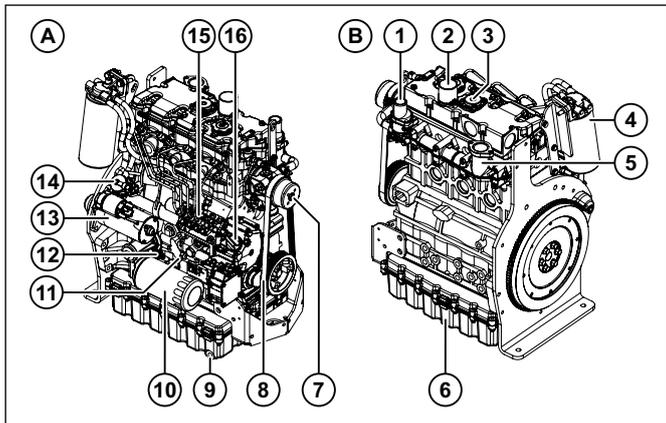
Diesel engine assemblies (Perkins diesel engine)
